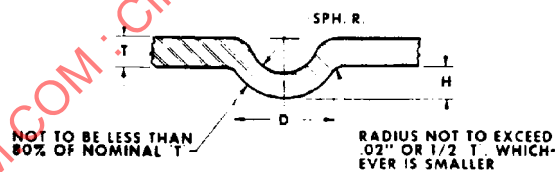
A—DEFINITION OF PROJECTION WELDING. PROJECTION WELDING IS A METHOD OF RESISTANCE WELDING BY WHICH THE CURRENT FLOW AND HEATING DURING WELDING ARE LOCALIZED AT A PREDETERMINED POINT BY THE DESIGN OF THE PARTS BEING WELDED.
